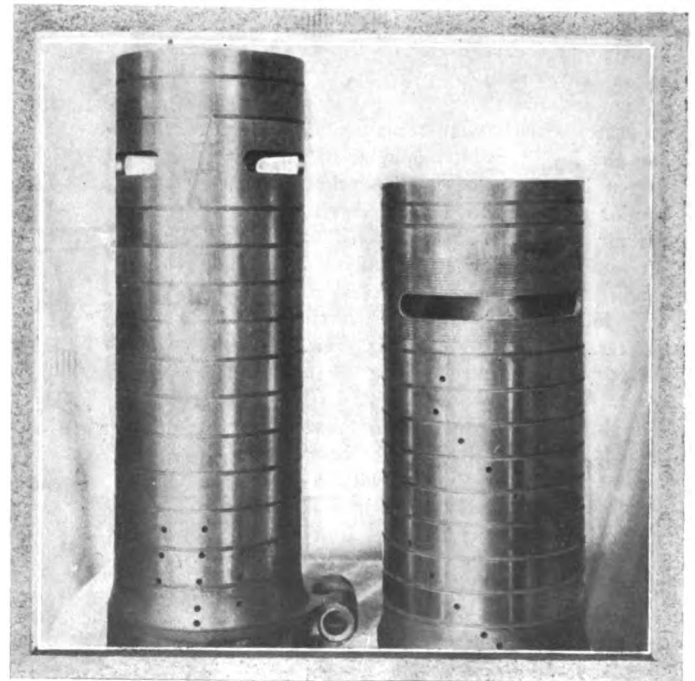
General view of the inner and outer sleeve, showing method of slotting and diagonal drilling for lubrication
